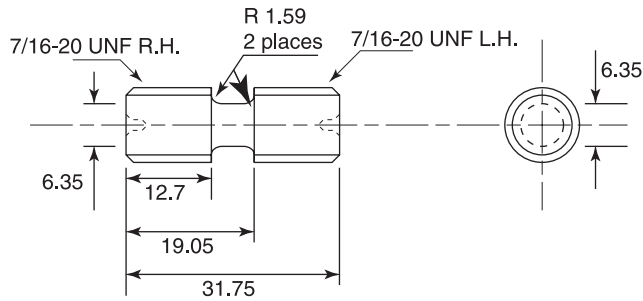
Tensile Hopkinson bar specimen used for PTFE. Dimensions in mm.
